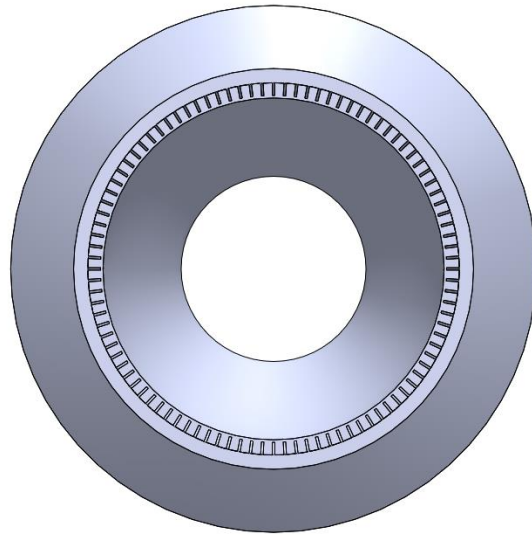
Axial View of Thrust Chamber With Channels, Liner, & Jacket
